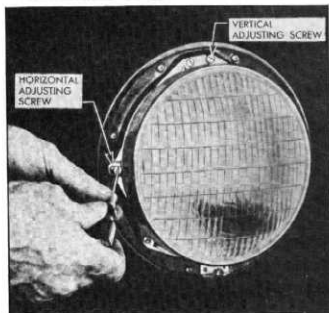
Removing Sealed Beam Retaining Ring Screws
